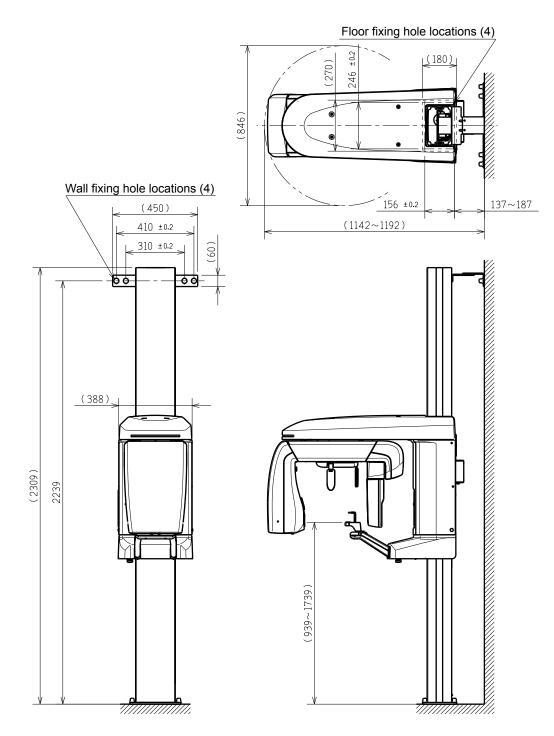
Fixing hole location measurements (Standing position wall-mount long type: Panoramic type)
